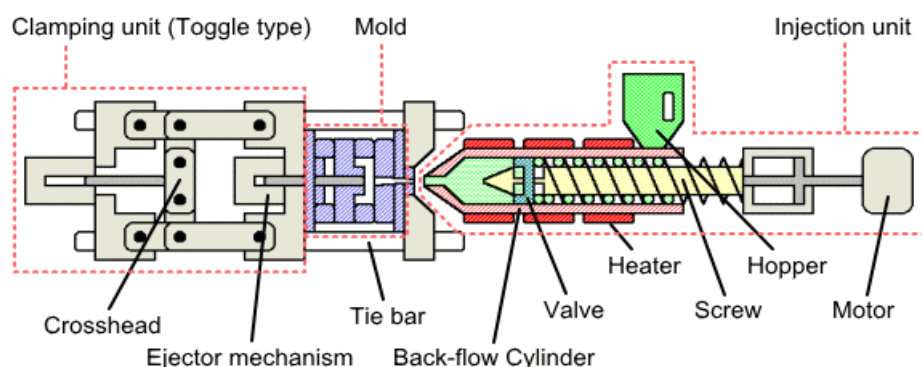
Plastic Injection Moulding machine. [4] (Courtesy: Polypastics Co., Ltd.)
